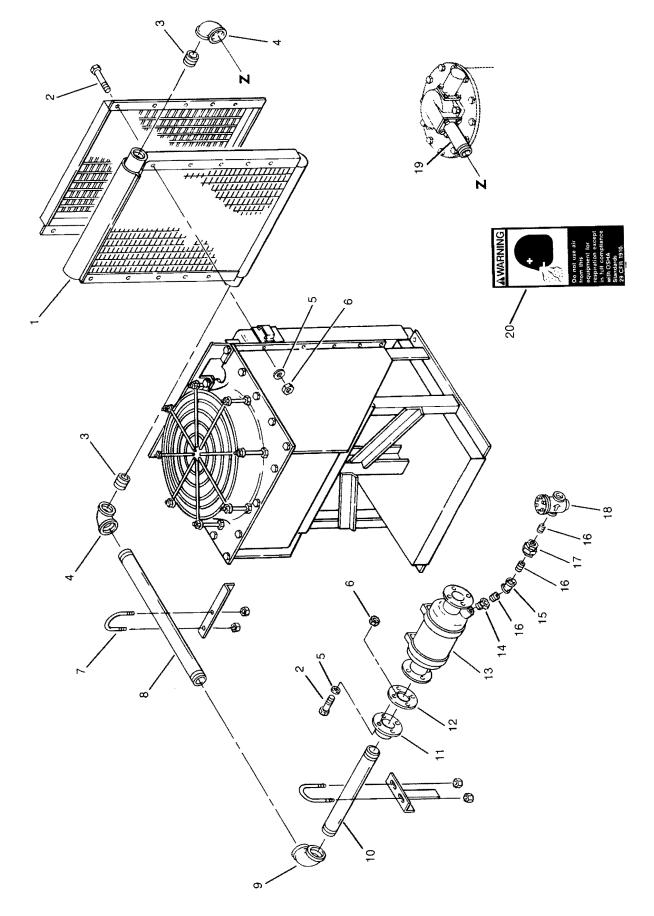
Compressor Cooling and Lubrication System Diagram (Air-Cooled Shown)
